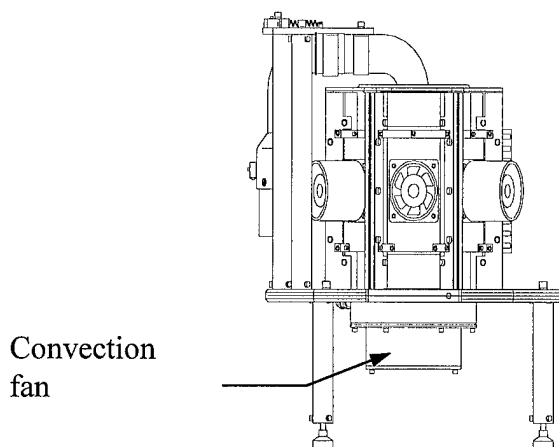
Drawing Showing the Proposed Location for a Convective Fan.
